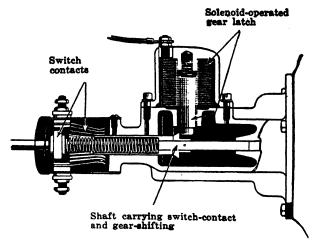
Sectional View of Auto-Lite Starting Switch and Gear Release
